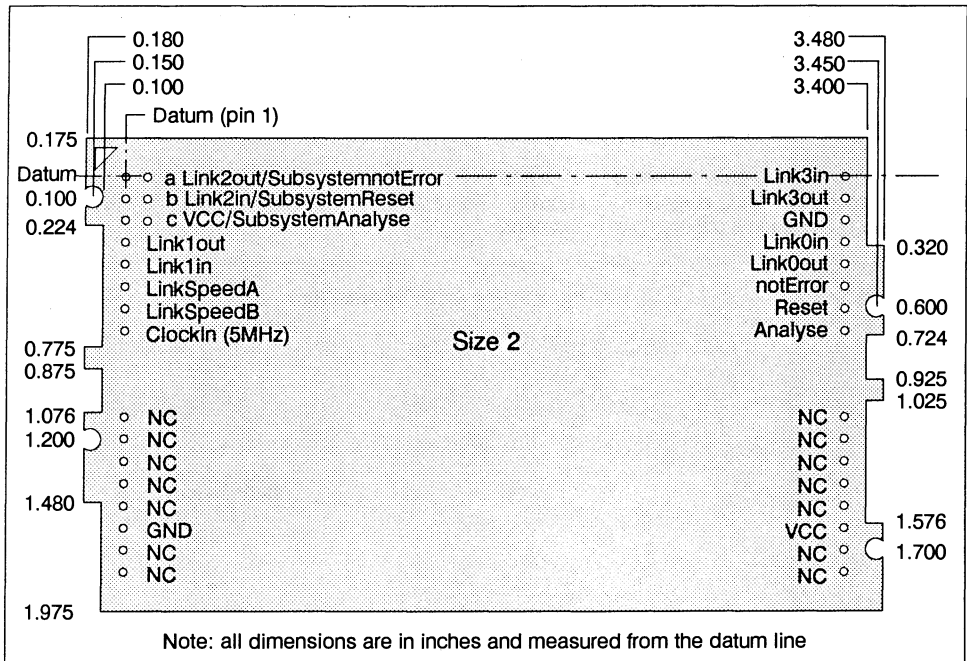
IMS B422 outline drawing (All dimensions in inches)
